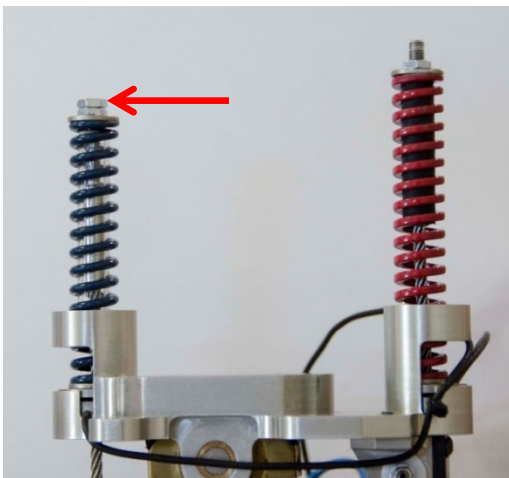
Jam nut installed on top of adjustment nut on front spring tower.
